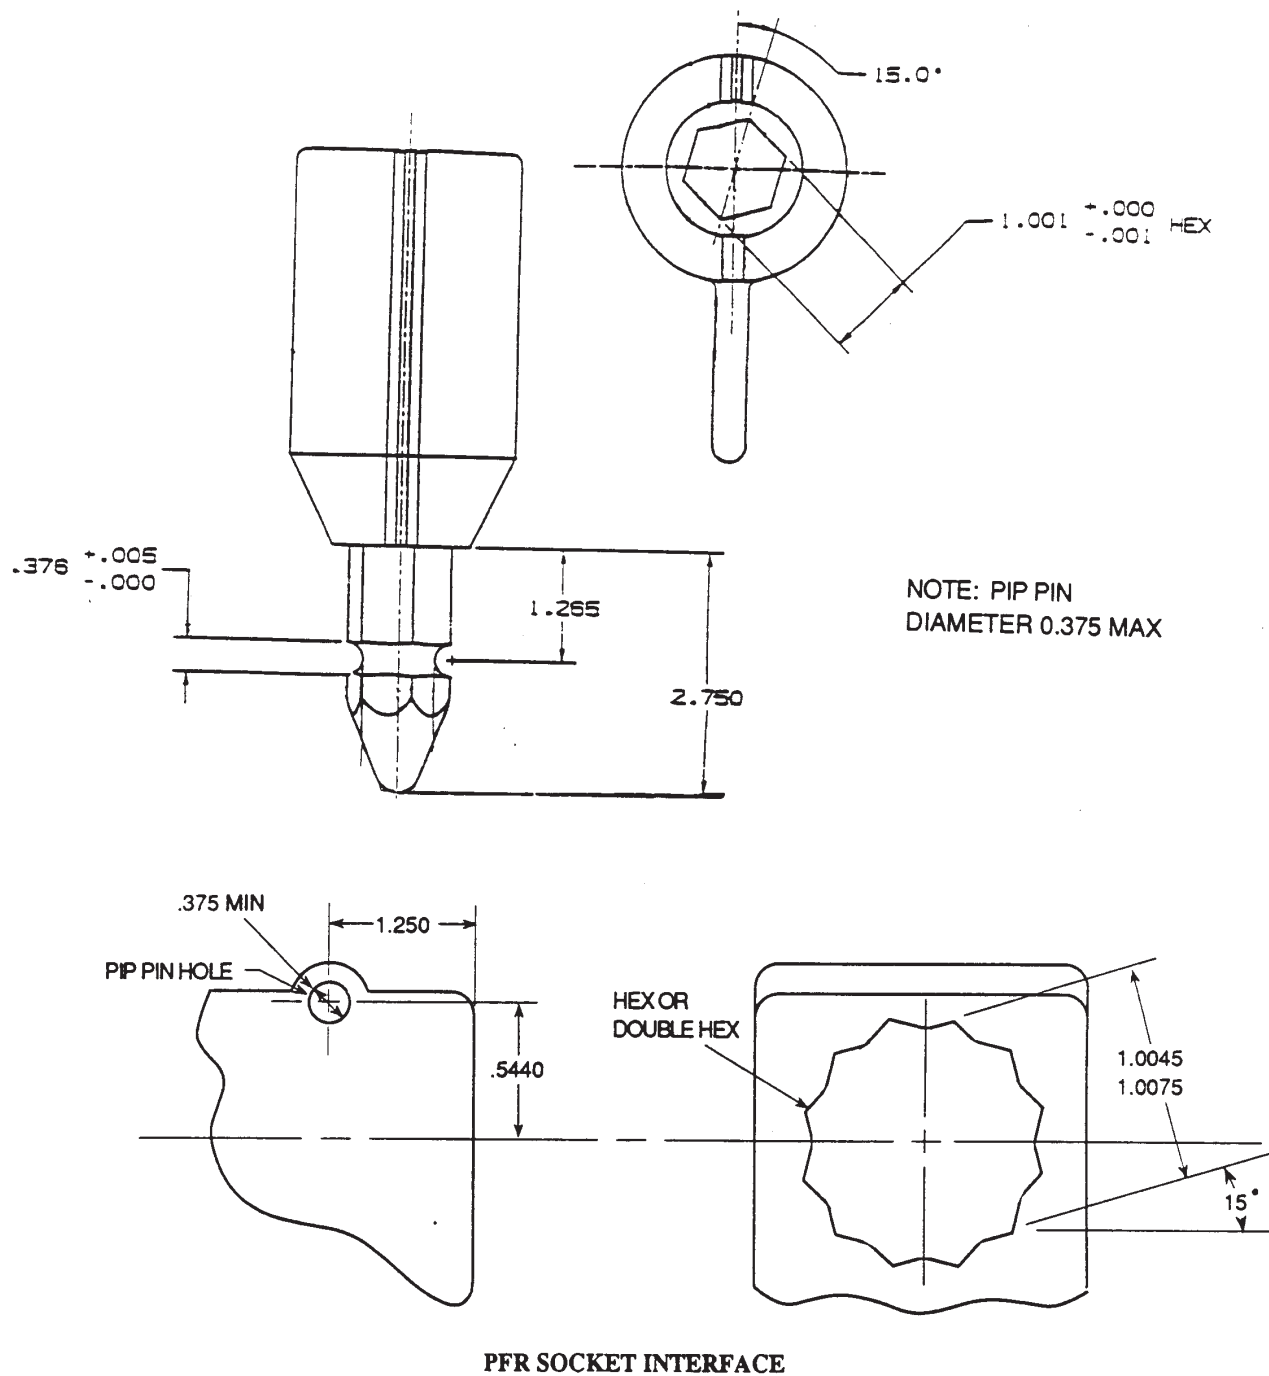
WIF PASSIVE ADAPTER TO SHUTTLE-STYLE PFR SOCKET
